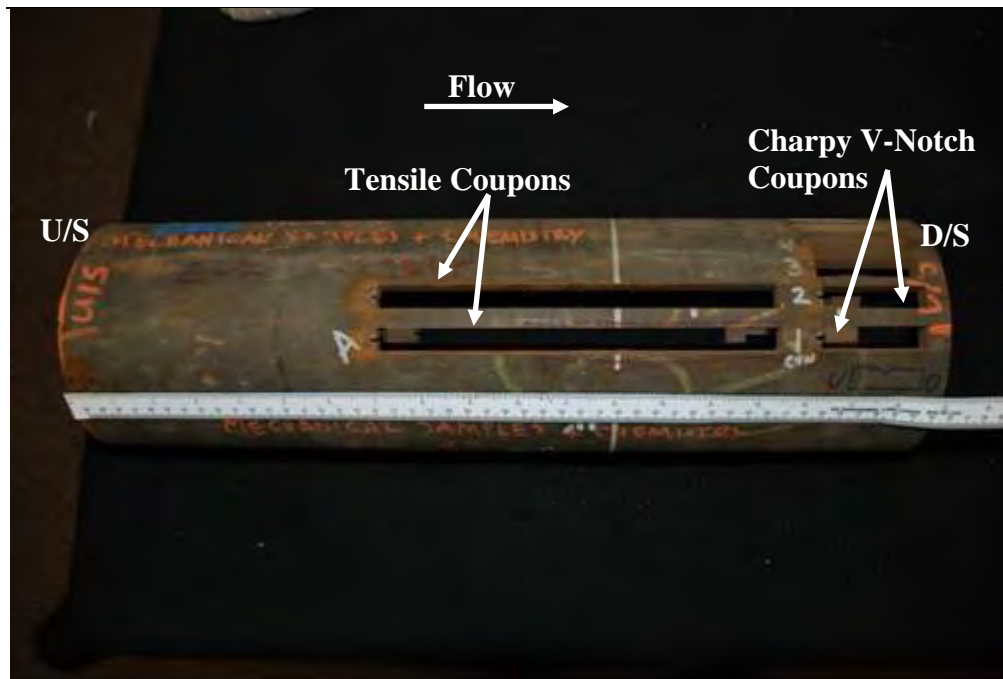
Photograph of 83-Q Showing the Locations for Mechanical Coupon Removal
